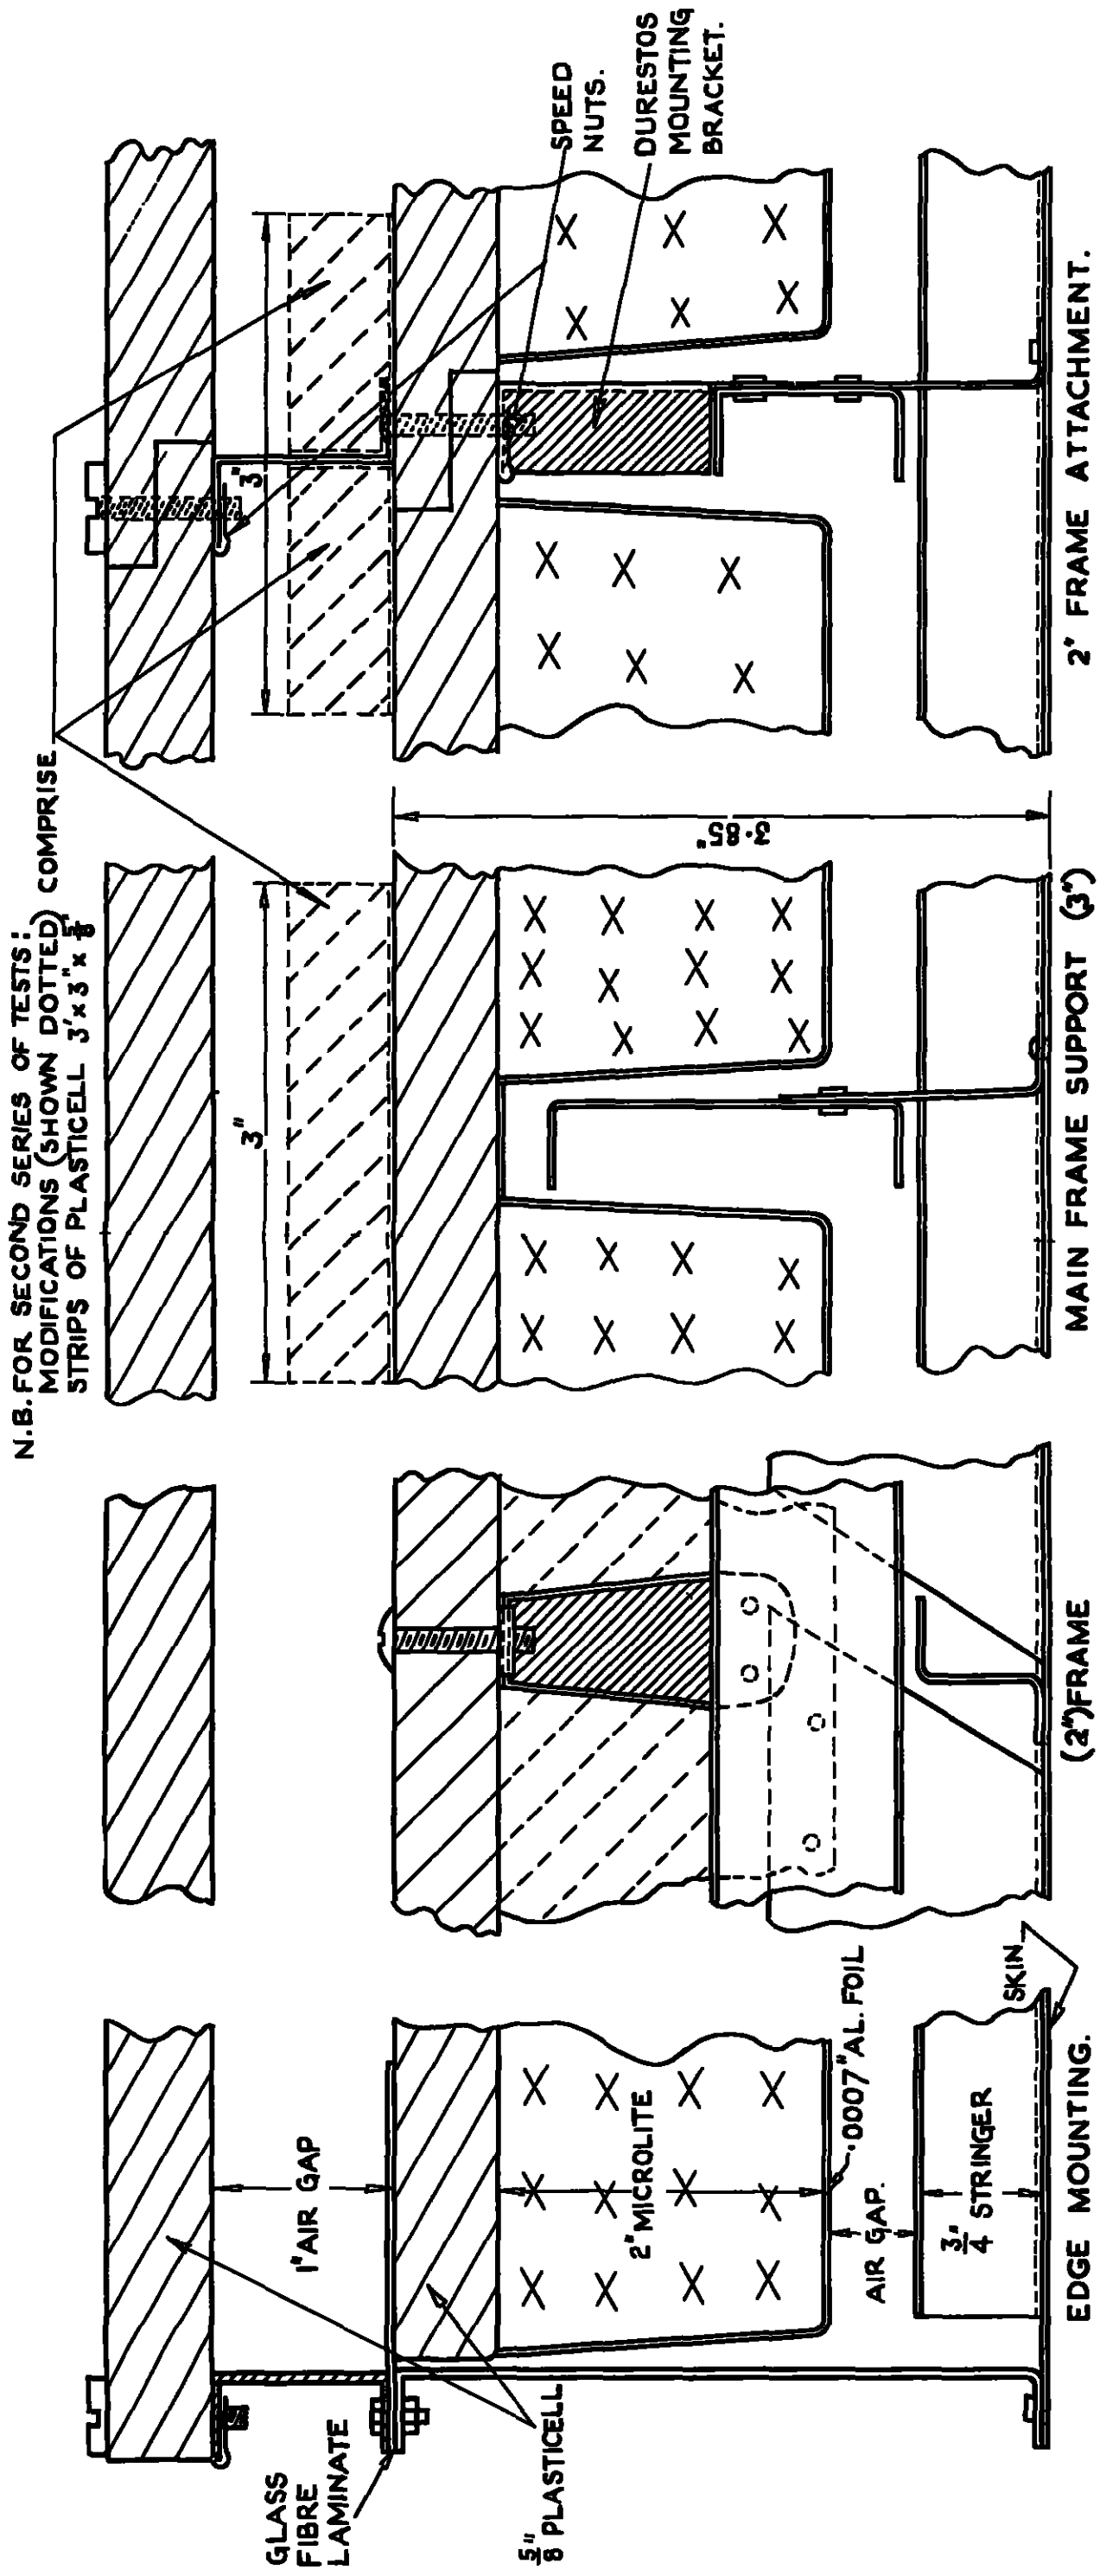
DETAILS OF ATTACHMENT OF INSULATION TO STRUCTURE.
